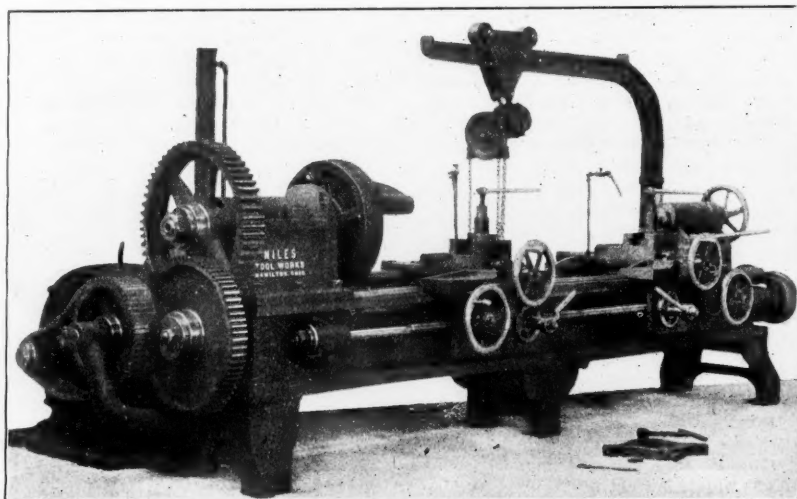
Niles-Bement-Pond Single Axle Lathe.
